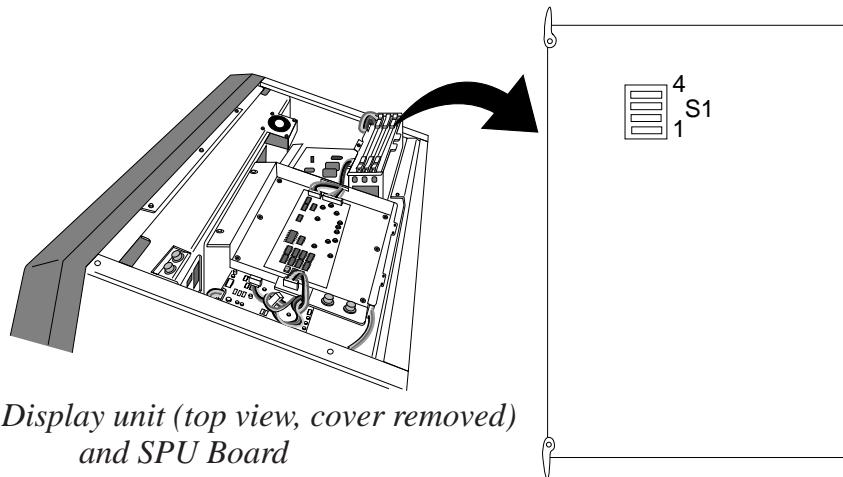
Display unit (top view, cover removed) and SPU Board
